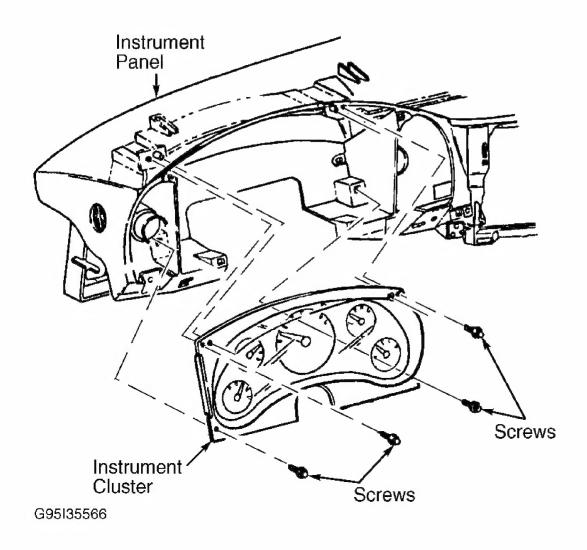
Exploded View Of Instrument Cluster (Typical) Courtesy of GENERAL MOTORS CORP.
